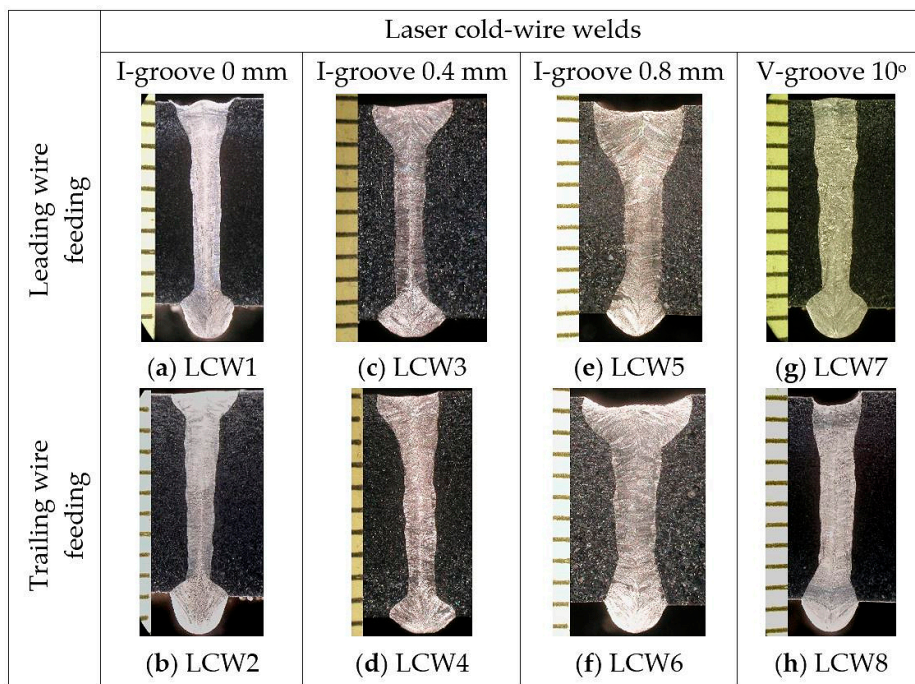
Weld cross-sections (a–h) from laser cold-wire welding tests.
